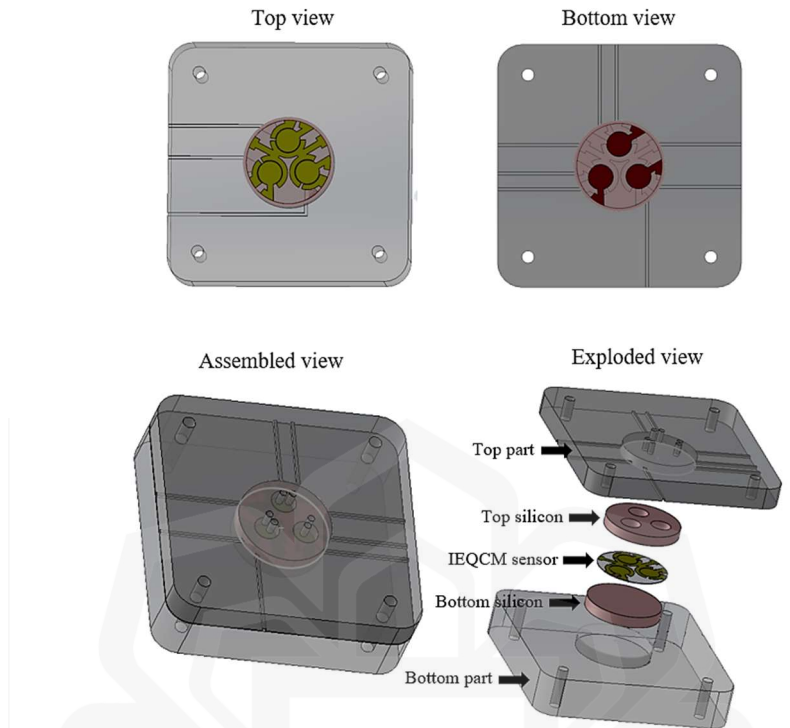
Top, bottom, assembled and exploded view of fluidic chamber.
